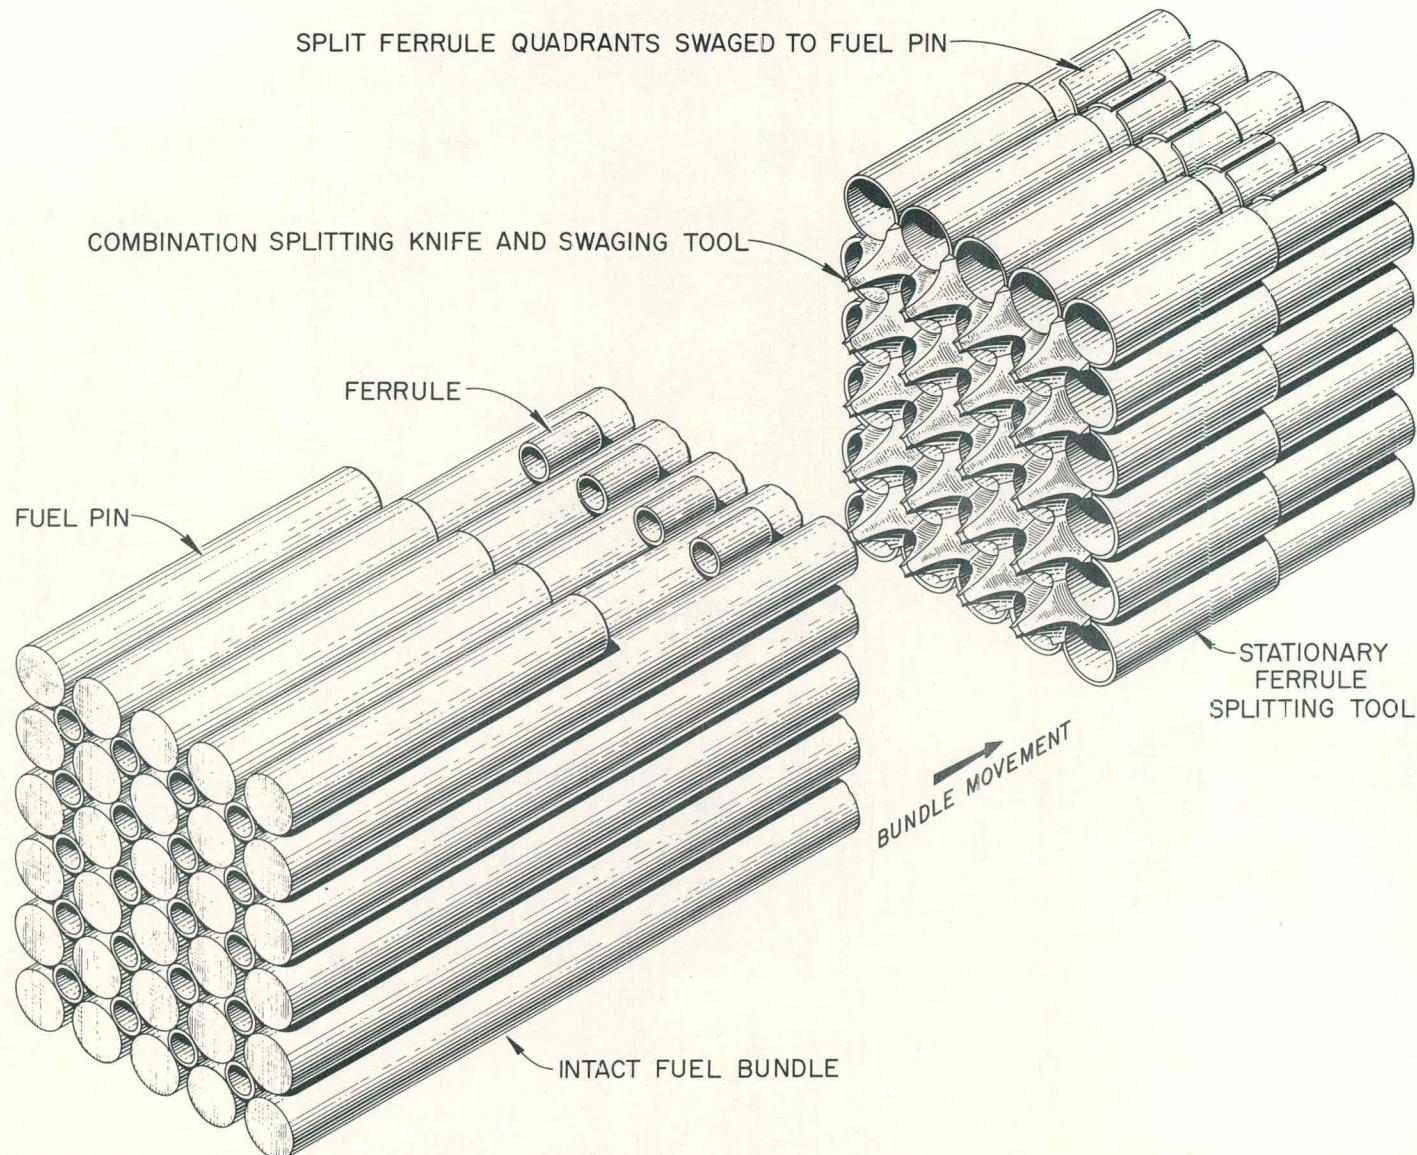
Ferrule Splitting Tool for Separating Individual Tubular Elements from a Fuel Assembly.
